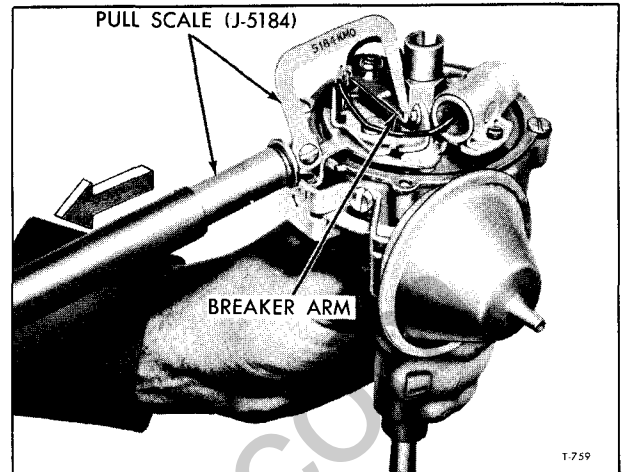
Checking Breaker Arm Spring Tension (V6 Engine)
